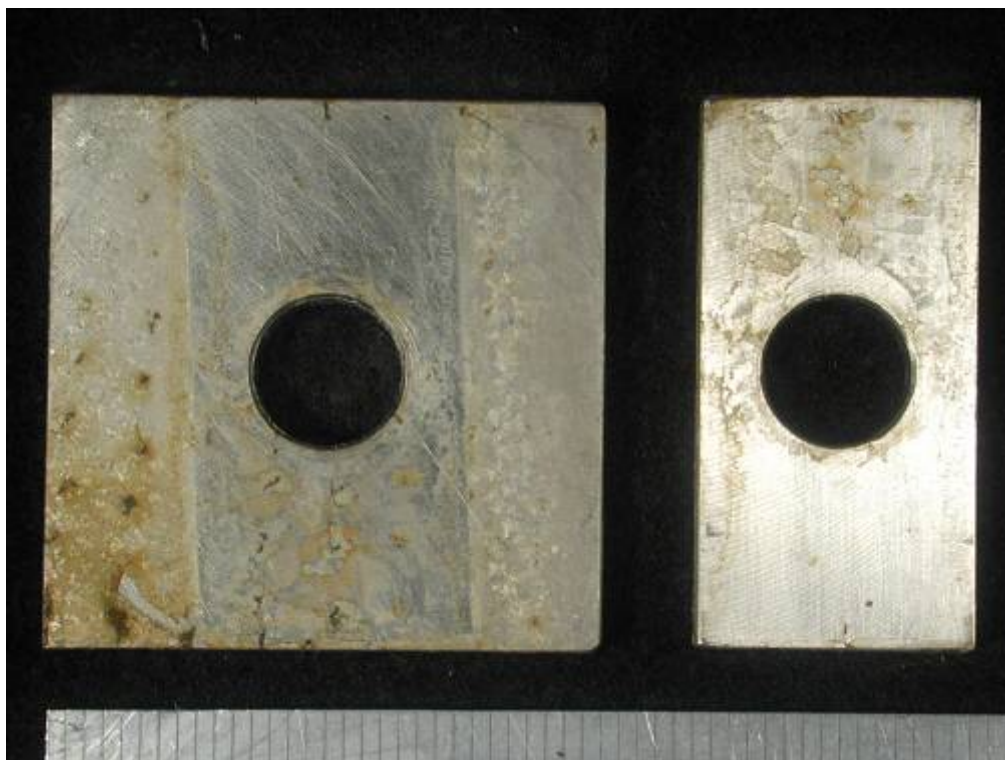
Welded Alloy 625 coupons after test in 20 ppb O₂, before cleaning.
